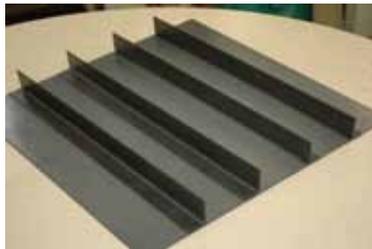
upper panel prototype induction welded PPS-carbon stringers.
